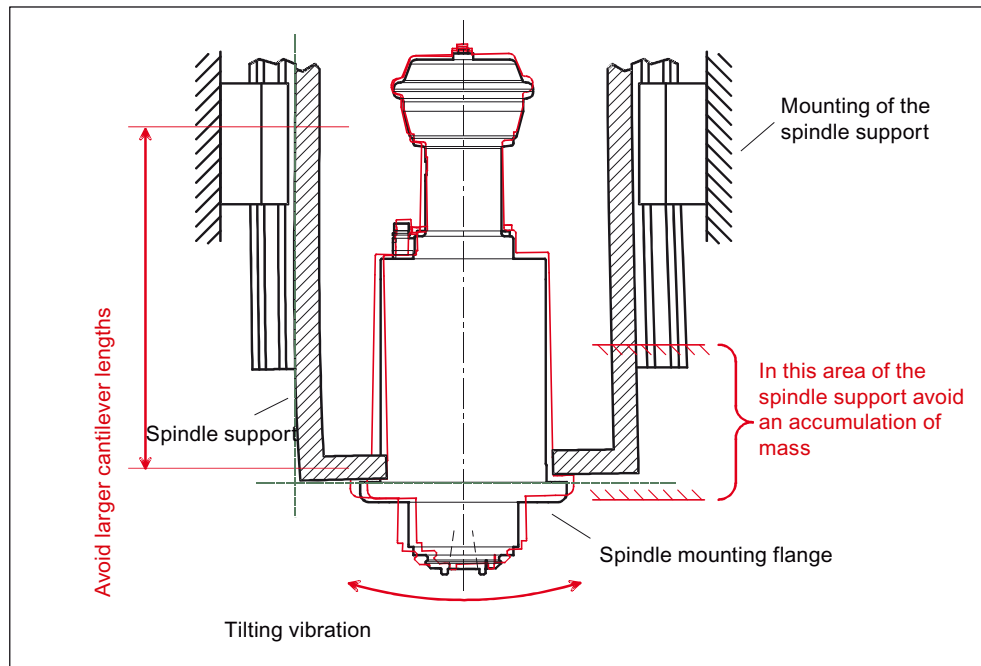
Example: Tilting vibration for extended spindle mounting
